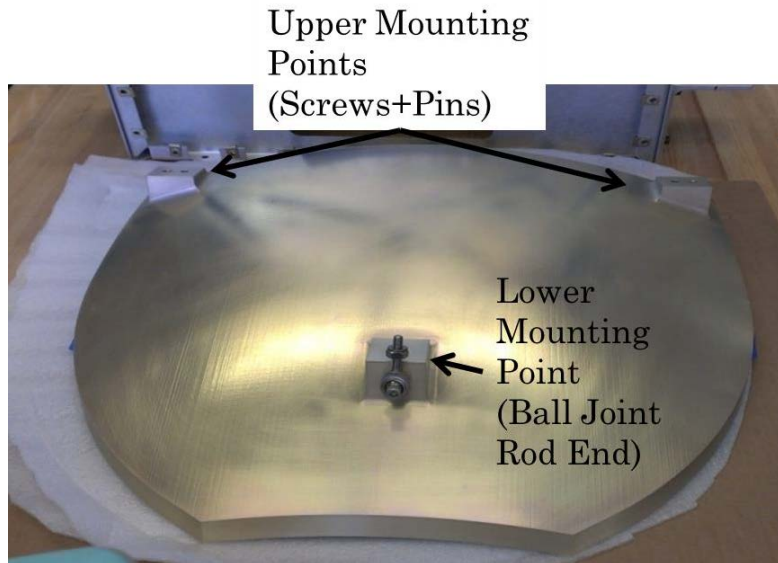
Fabricated Offset Paraboloid Before Chassis Integration.
